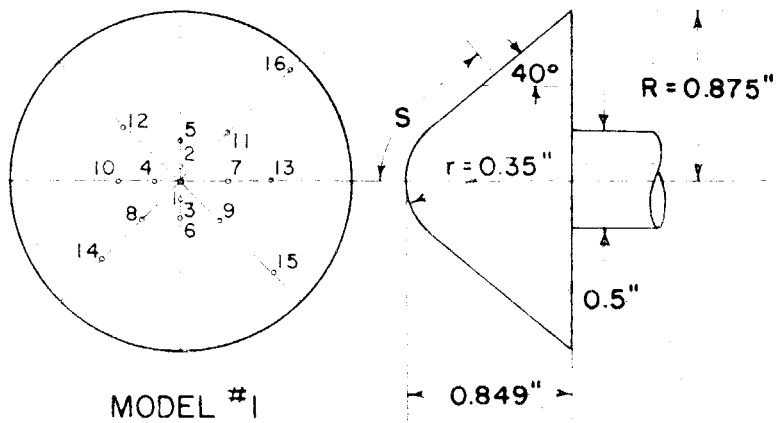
DETAILS OF TYPICAL MODEL CONSTRUCTION
